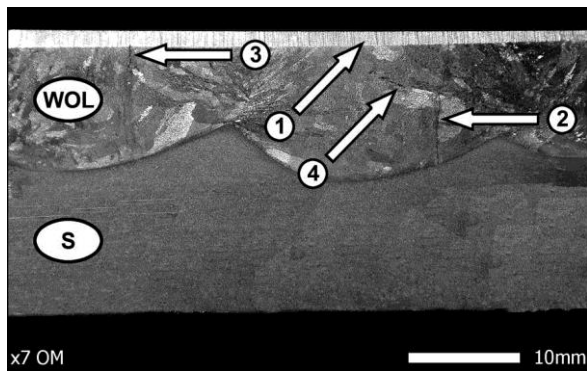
Macroscopic image of the EL-Hard 70 weld overlay layer. Grinding marks (1). In the padding weld are visible two extensive macro-cracks (2) and (3) and numerous small and scattered discontinuities (4). WOL - weld overlay layer, S - substrate. Etched with Mi1Fe and electrolytically with chromic acid, OM
